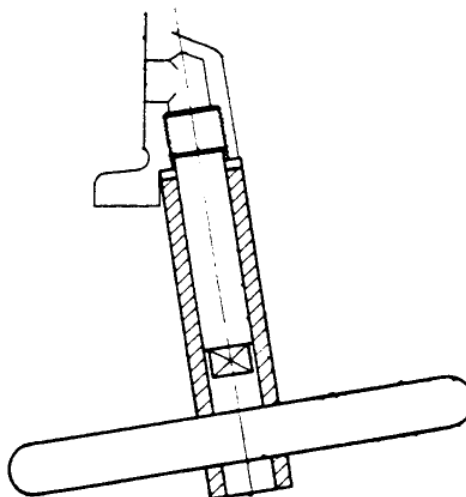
VIEW SHOWING SPOT-FACING TOOL IN POSITION ON CRANKCASE.
